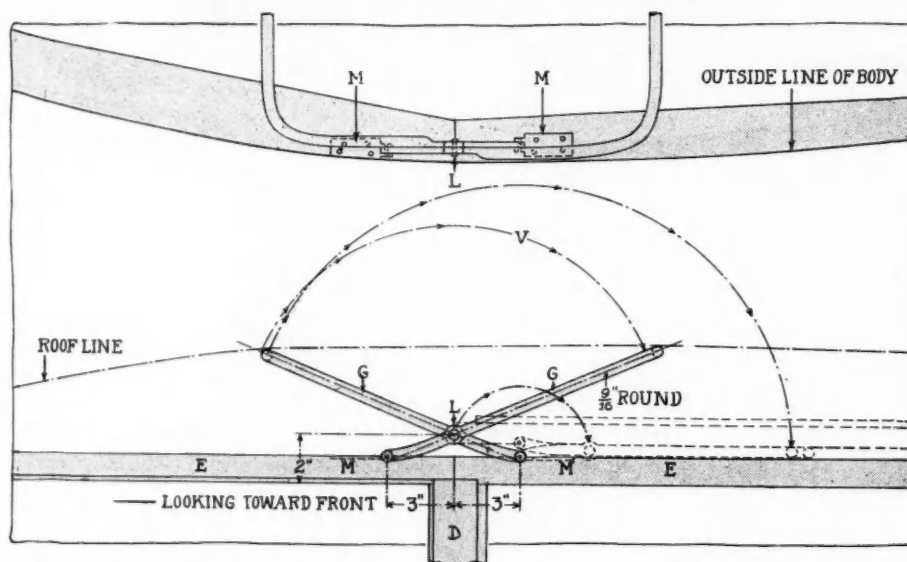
Upper—Plan view of scissors bow hinge. Lower—Elevation of the scissors bow hinge
